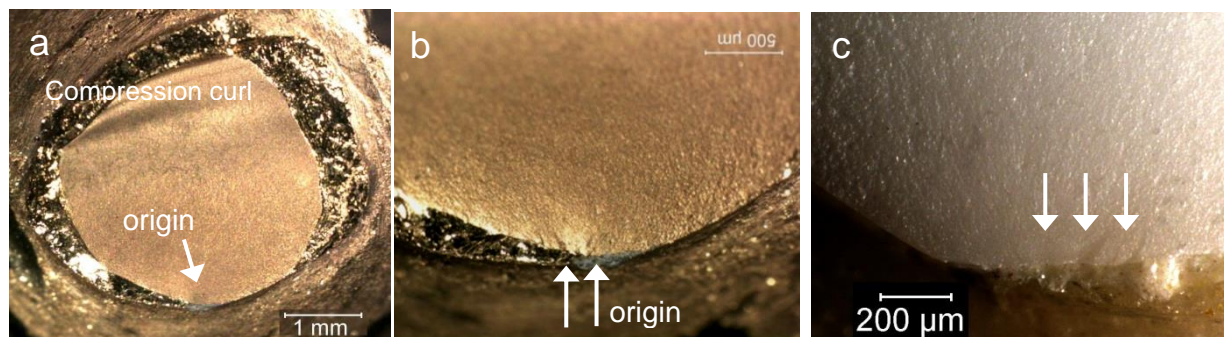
Case B3. Optical views of the fracture surface. (a) and (b) are gold coated. The origin is a series of small grinding cracks in the core that were covered by the veneer. Gold coating and vicinal shadow illumination make the “zipper machining crack” hackle lines easy to see with optical examination. They were not evident with high magnification SEM examination. (c) is a simple optical image of the uncoated fracture surface taken by Dr. J. Quinn in 2003 that also shows the grinding crack hackle and veneer irregularities.
